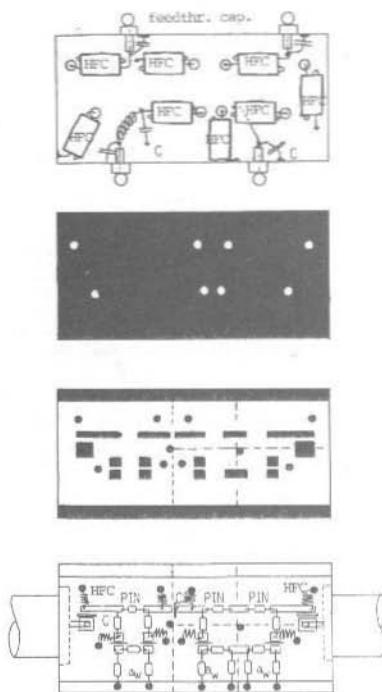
Suggested construction for an electrically-switched attenuator in strip-line technique
